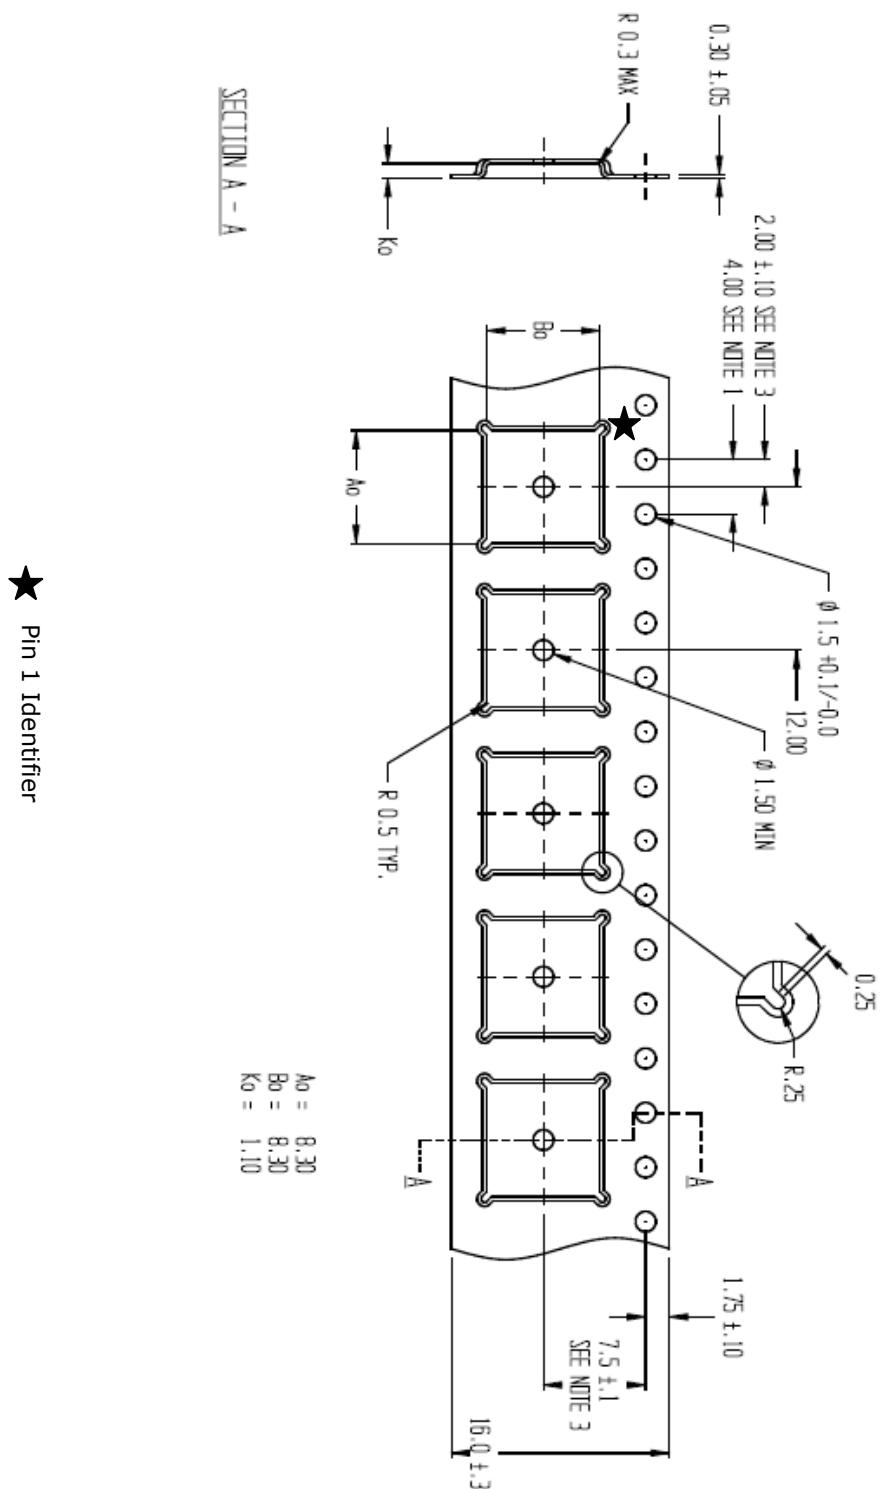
VNC2 – QFN-48 and QFN-64 Carrier Tape Dimensions
